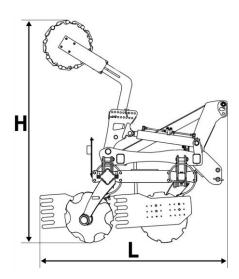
Transport dimensions of the GAL-E disc harrow with tubular roller (D - width, L - length, H - height) (see Table 5)
